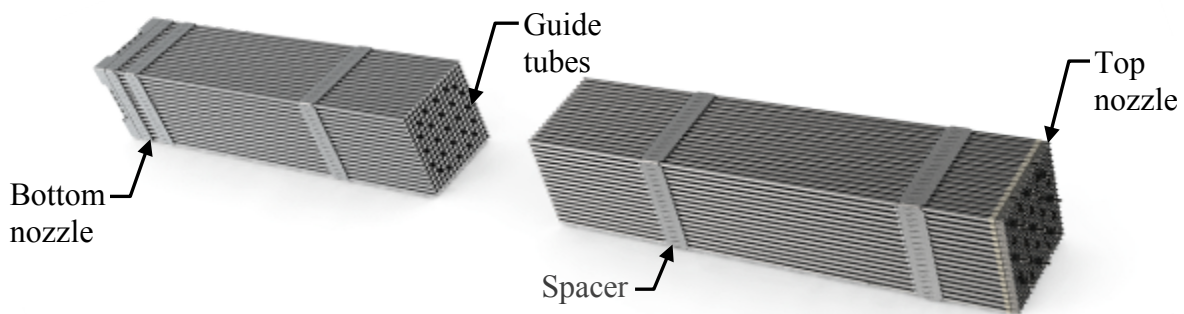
Various components in a typical 17×17 PWR fuel assembly
